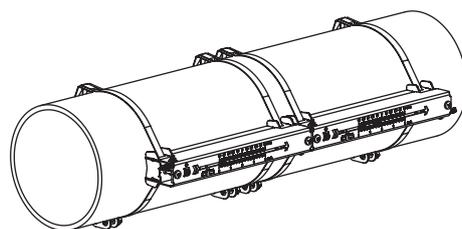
Transducer mounting fixture Variofix L (reflection arrangement)
